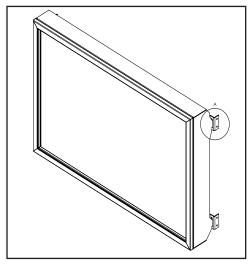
Installing Safety Screen onto Cabinet Bracket (Parts removed for clarity)
